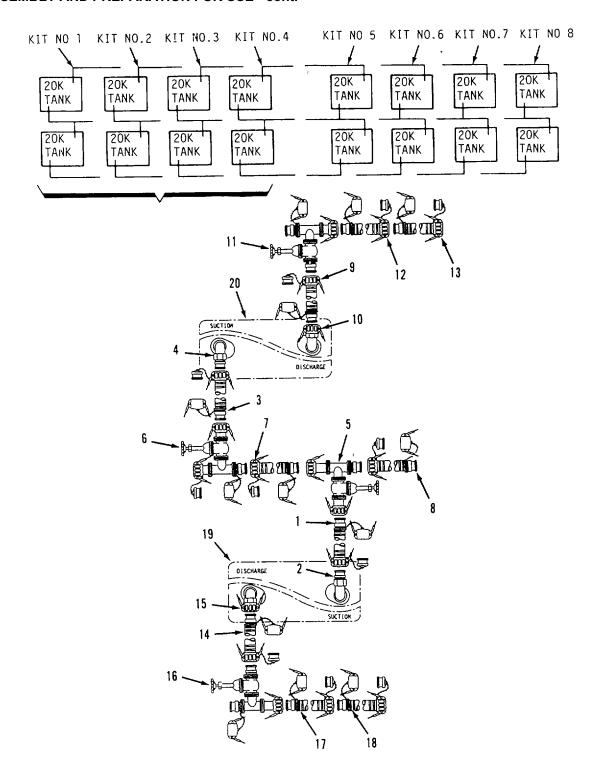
Dual Tank Connection Kit Assembly (sheet 1 of 2)
